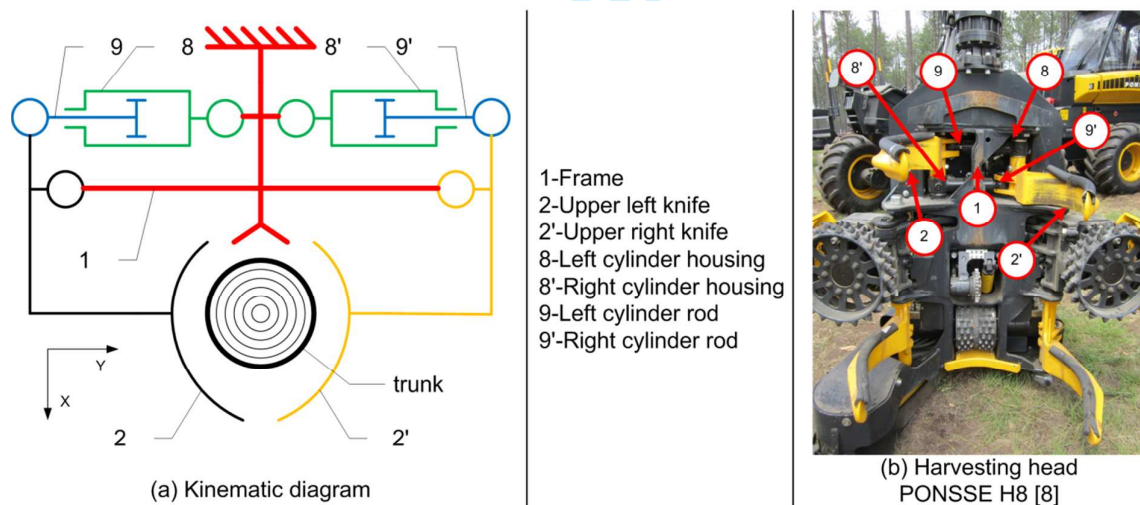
Upper knives moved by a concentric gripping mechanism with two actuators.
